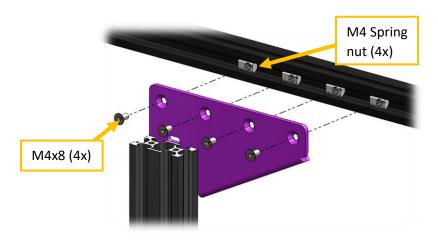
Front joint detail, M4x8 mm screws and nuts.
